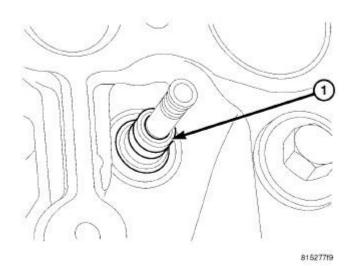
Valve Seal Courtesy of CHRYSLER LLC
